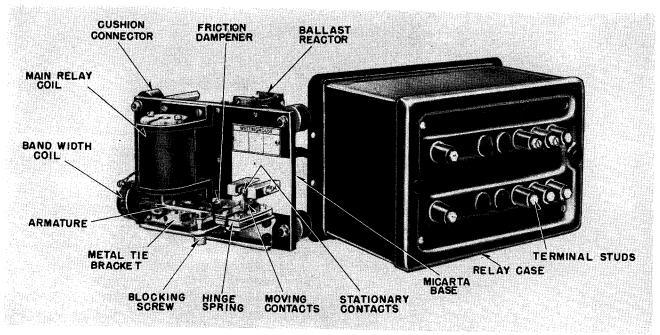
Front View of SJS Relay Element Assembly and Rear View of Case
